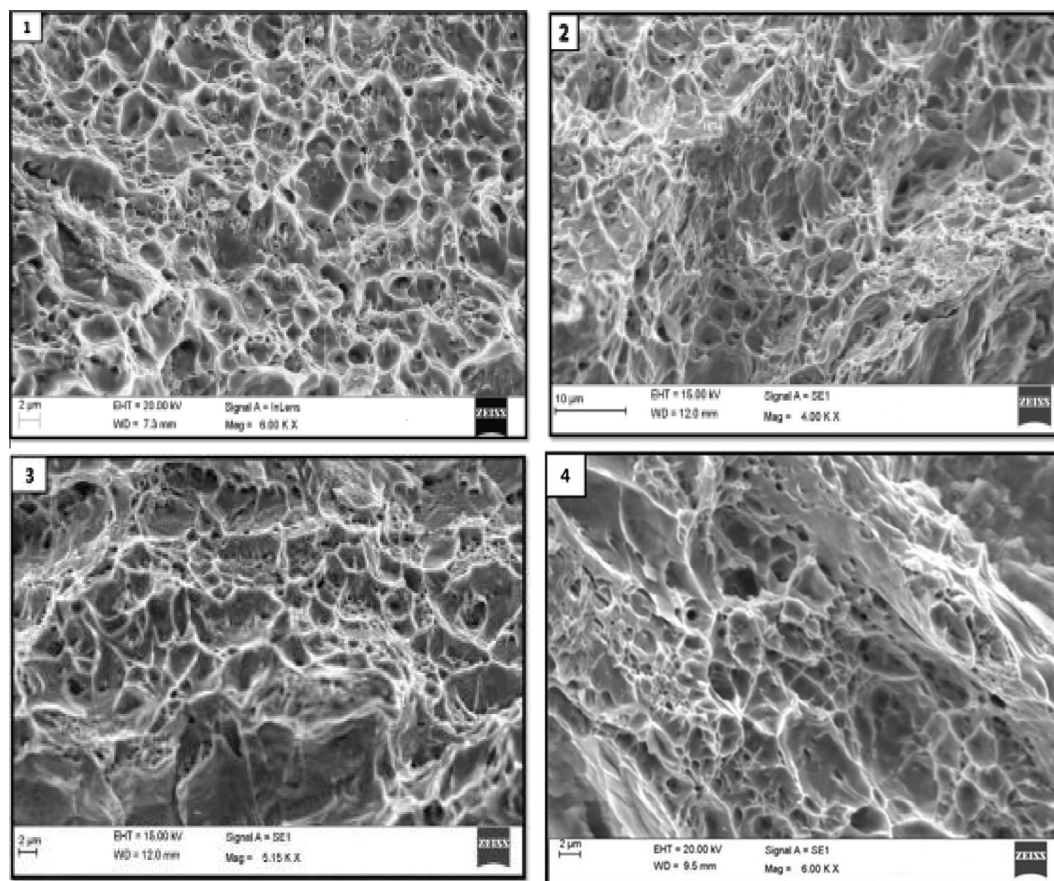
SEM fractography of the tensile tested SA516 grade 70 steel samples (1 – base metal; 2–4 welded samples).
